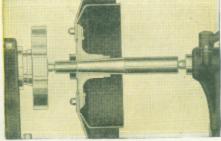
Rear Wheel Mounted on a Self-Centering Taper Mandrel.
